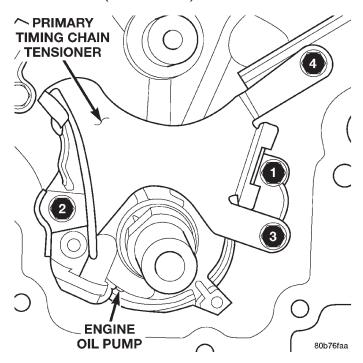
Oil Pump and Primary Timing Chain Tensioner Tightening Sequence
